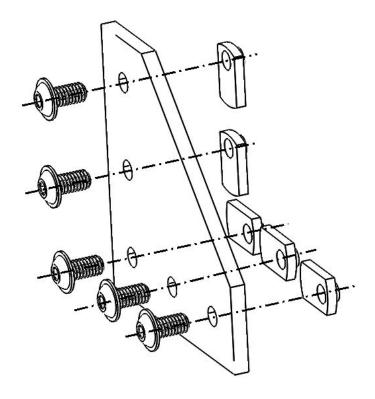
5 holes corner bracket with end feed fasteners
